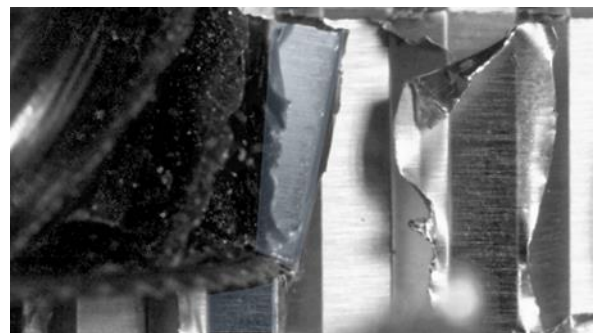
Chip formation mechanisms when machining aluminum honeycomb, cutting conditions: $V_f=1000$ mm/min, $N=2000$ rpm, cutting depth=10 mm.
